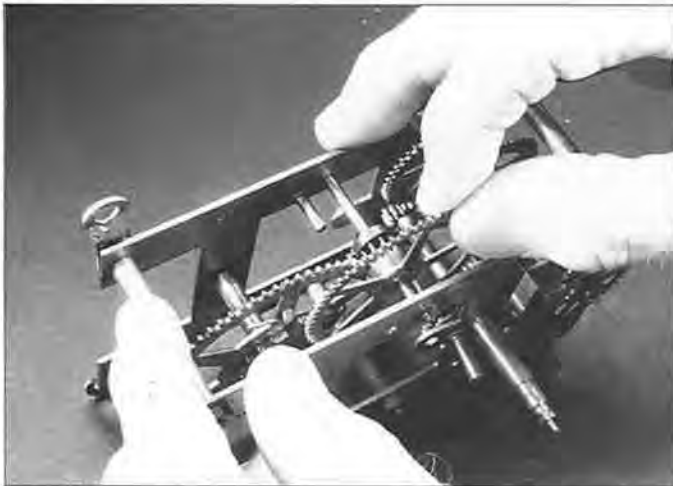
Assemble the movement and check wheel-pinion engagement. Also check end and side shake of every pivot.
